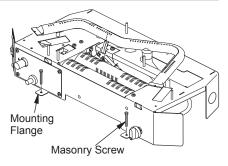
Attaching Base Assembly to Fireplace Floor (30" Model Shown)
